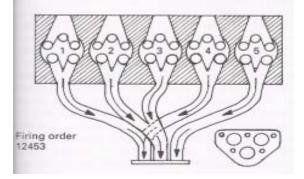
Five cylinder engine with five branch triple downpipe exhaust Manifold
